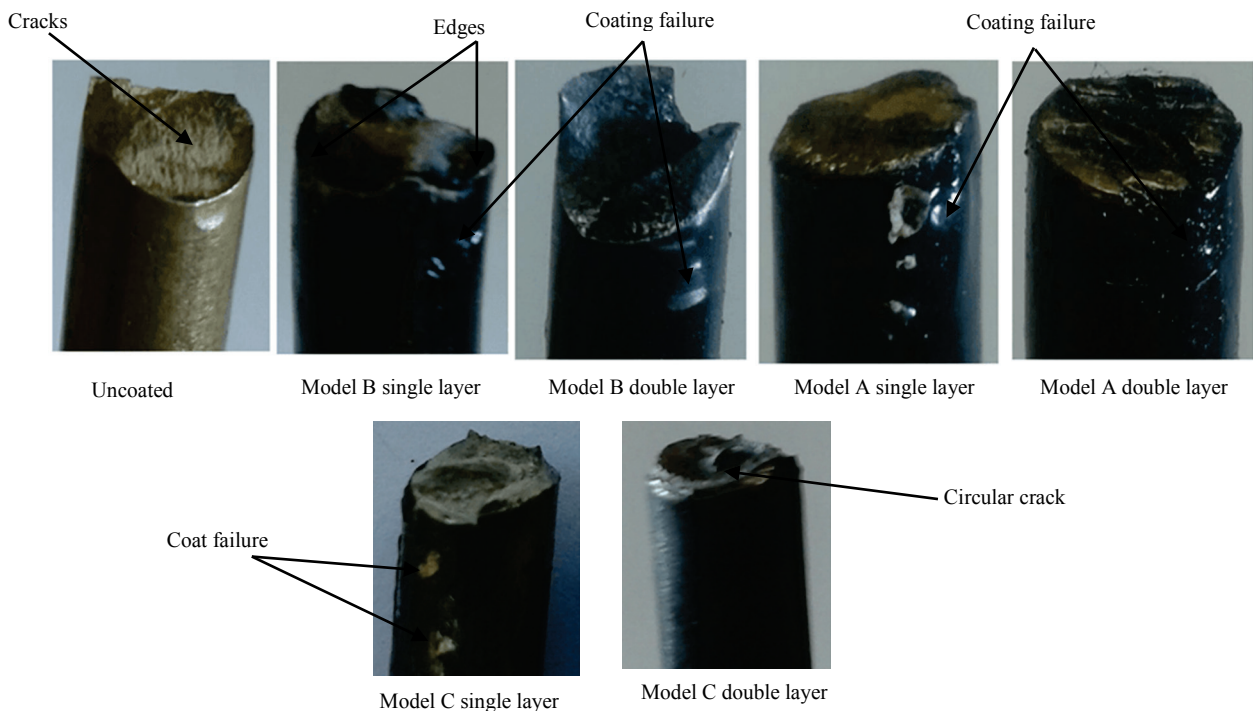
Fracture surface of specimens after fatigue test in west Qurna crude oil.
